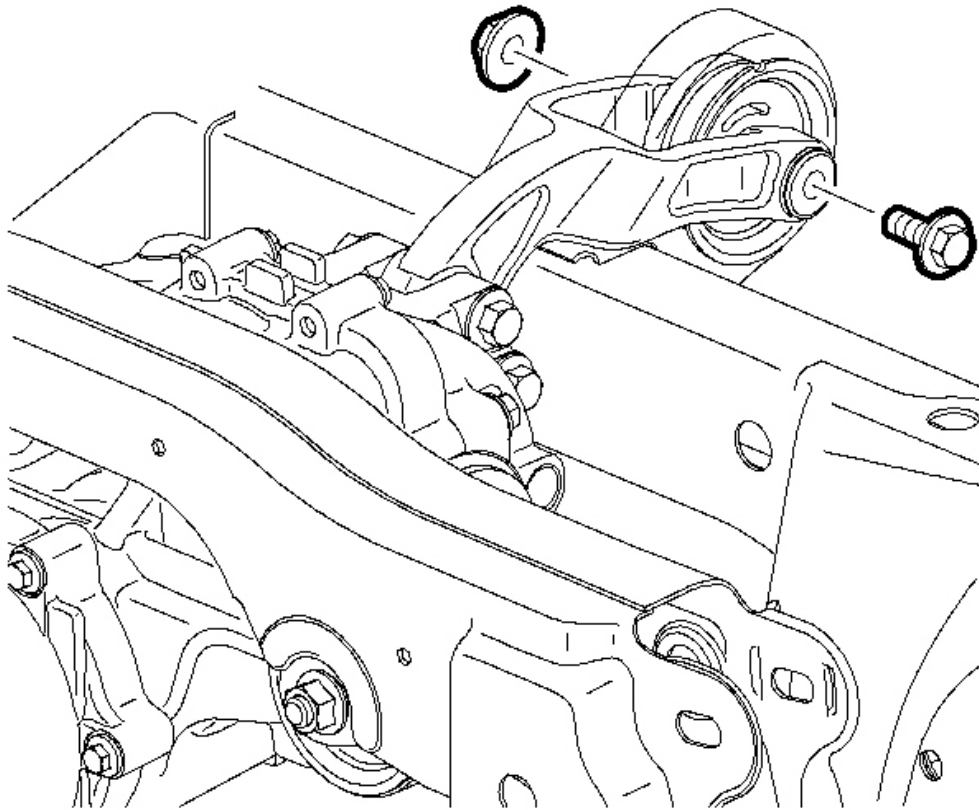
Removing/Installing RDM Rear Mounting Bracket
